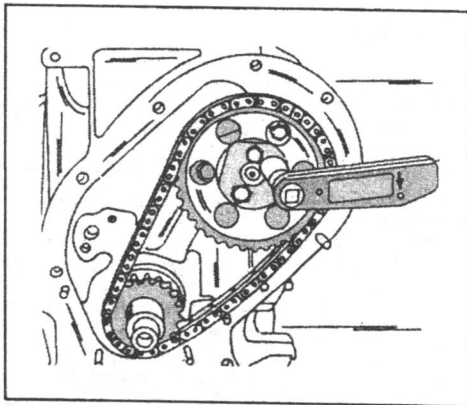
The camshaft sprocket is secured with three locked screws to the camshaft.
